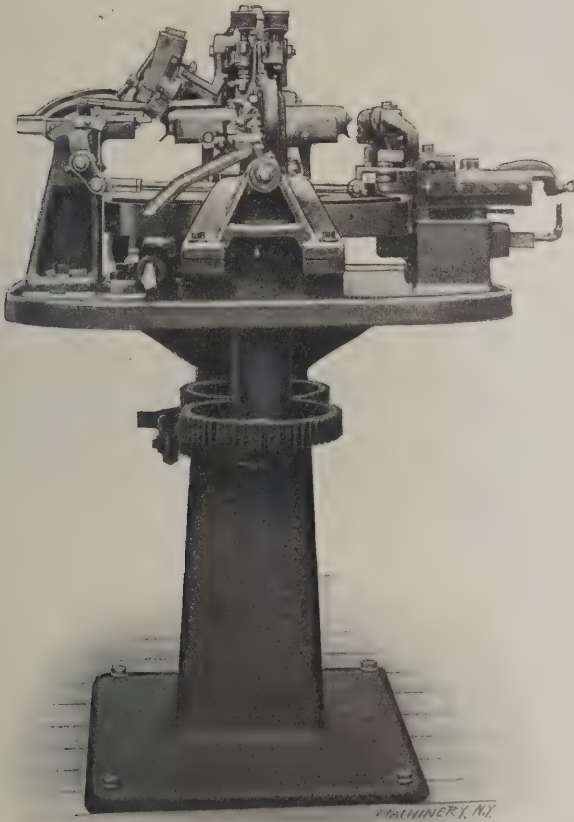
Needle-making Machine, showing Numbering and Lettering Head in Front.
